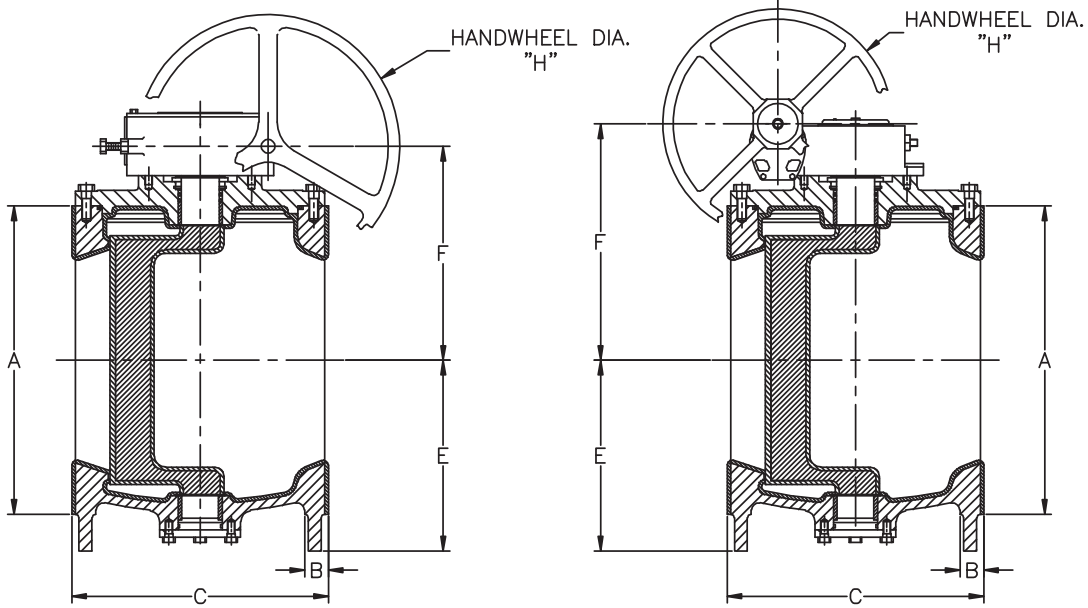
RL Rubberlined – Flanged End 3" – 12", 175 PSI, 14" & Larger, 150 PSI
